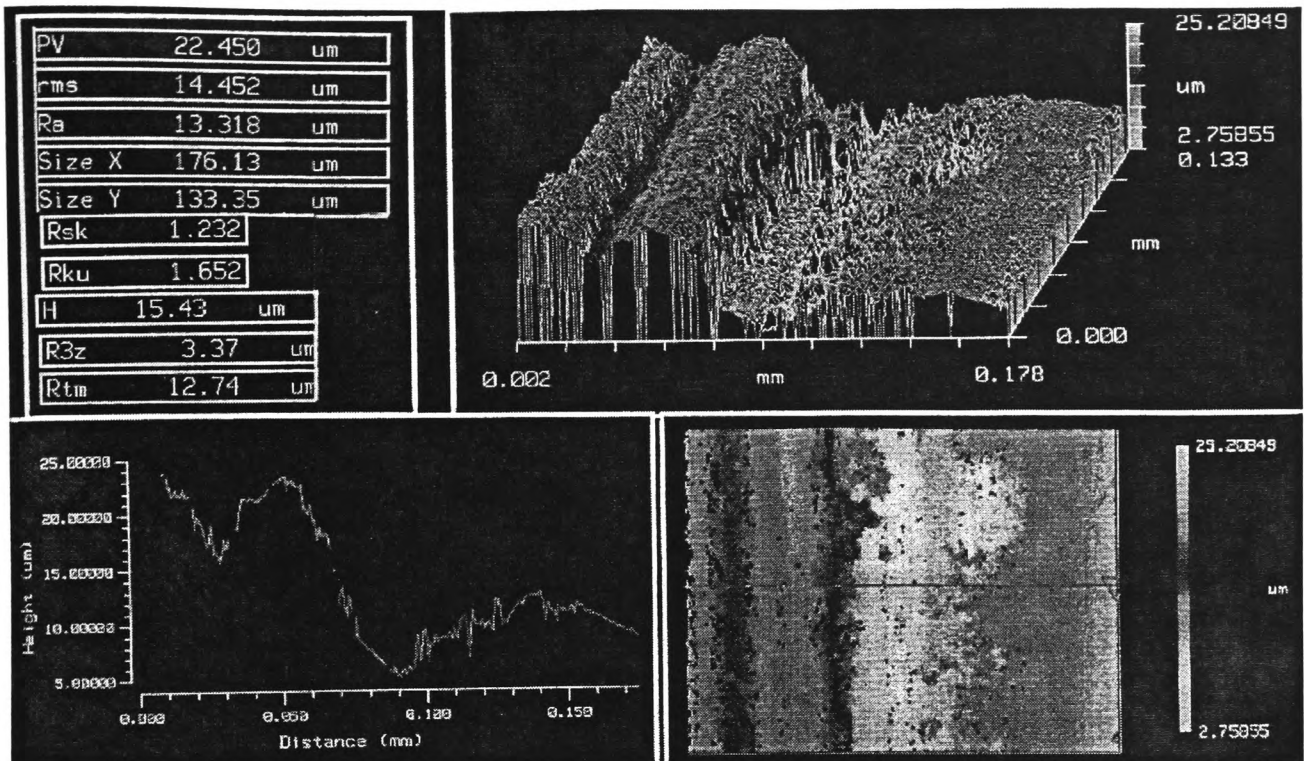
Depth of surface damage on the ground surface at 13 μm depth of cut, 20 m/s wheel speed, 2 mm/s table feed, D76 grit size cast iron bonded wheel and -0.3 grinding wheel/truing speed ratio. Grinding with artificial crack initiated on the surface.
